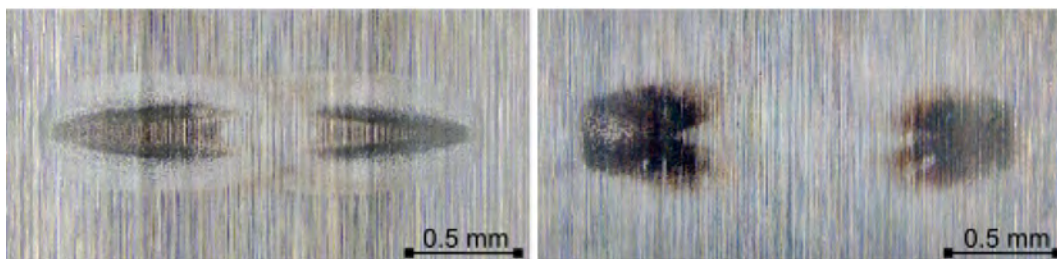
False brinelling (left) and fretting corrosion (right) [44].
